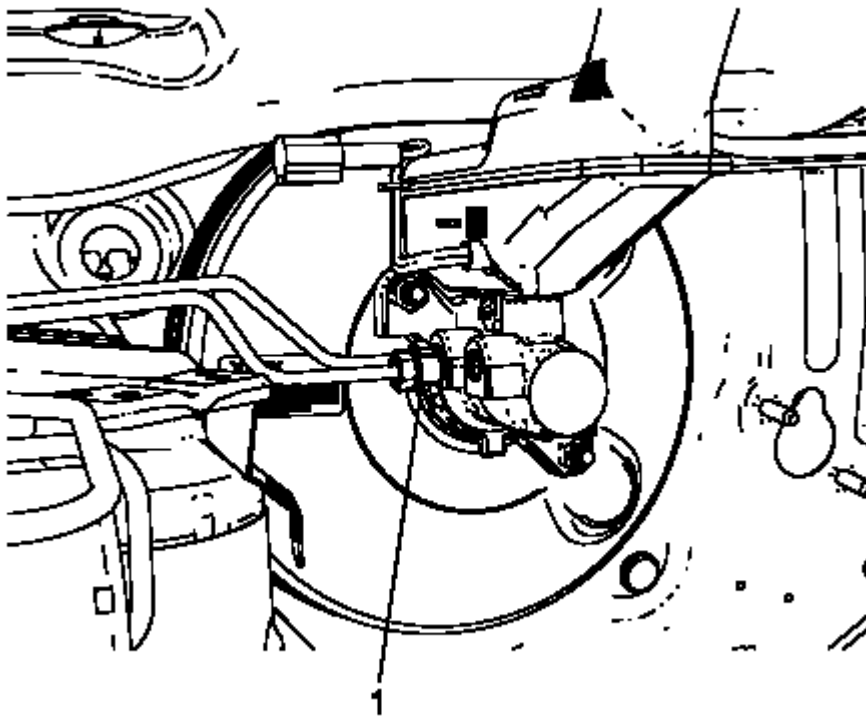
Master Cylinder Secondary Brake Pipe Fitting
